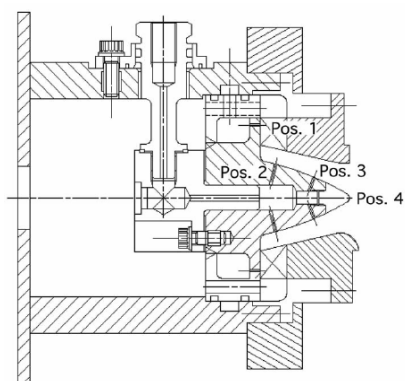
Technical drawing showing in section the injector, the fuel supplier and the swirler.
